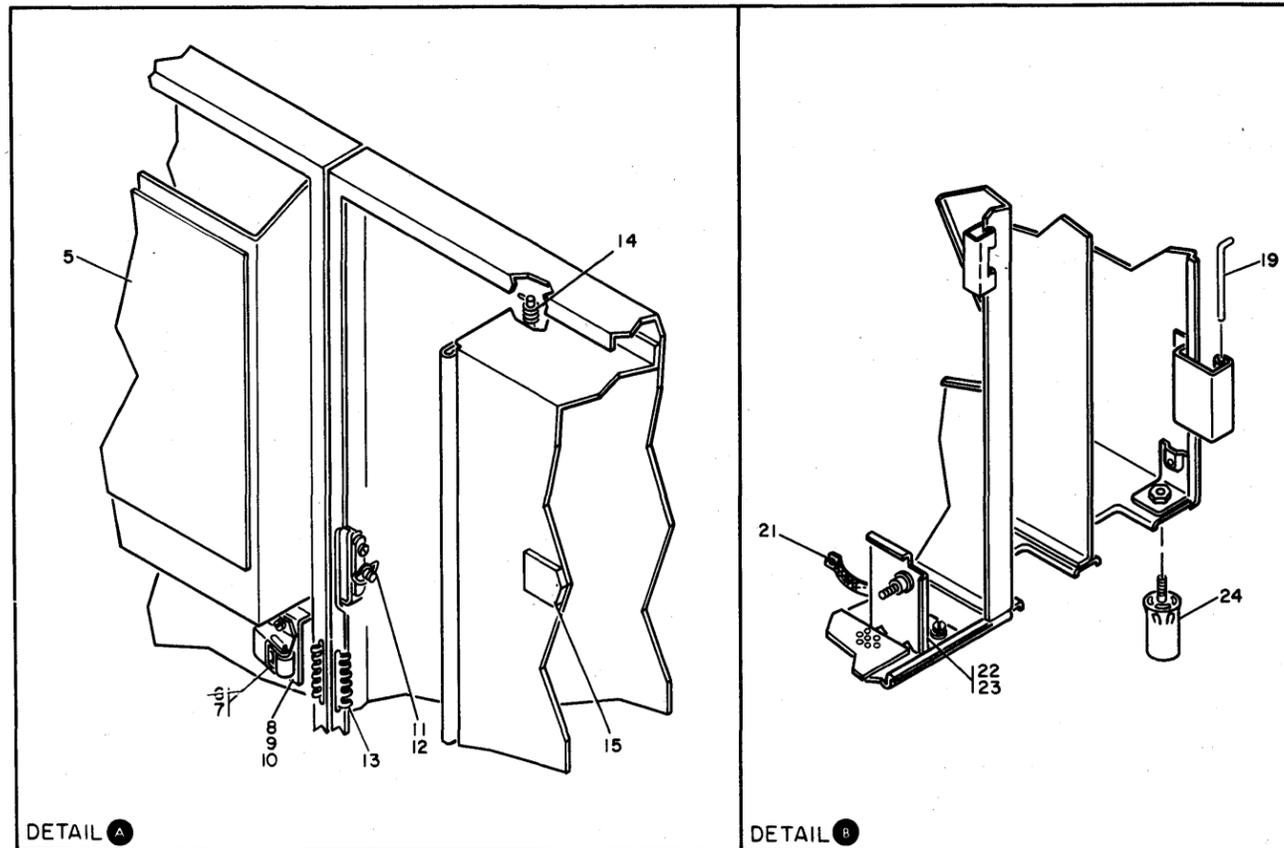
CABINET ASSEMBLY AND COVERS. SEE LIST 1.
